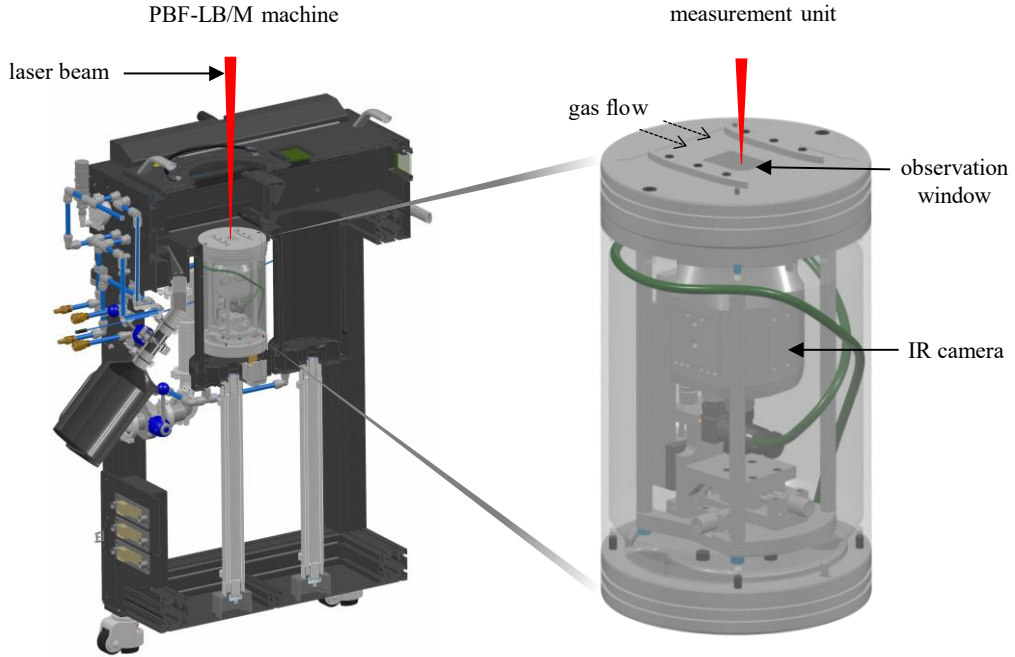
Integration of the measurement unit into the PBF-LB/M machine
